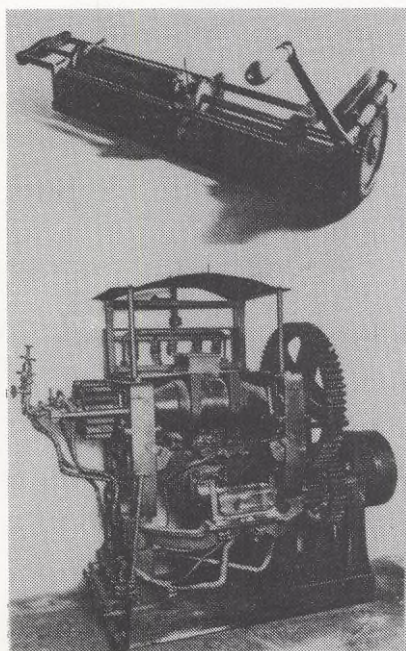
Above: Reproduction of the gutta percha press, invented by Werner Siemens, 1847. Below: Cable insulating machine, about 1900. From: Siemens Museum, München.
